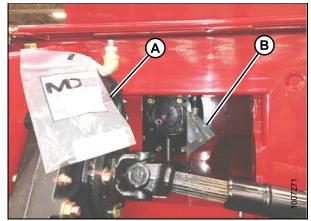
Bevel Gearbox– 16 ft. Shown, 13 ft. Similar
